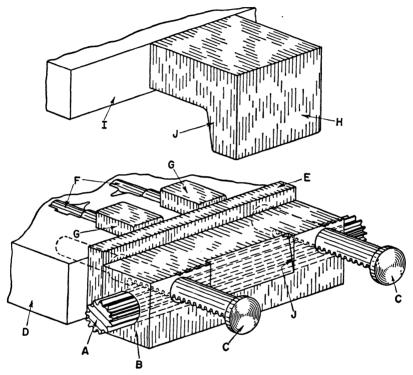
Rack-and-pinion core pull. Not shown is the hydraulically actuated rack that engages the pinion A.
